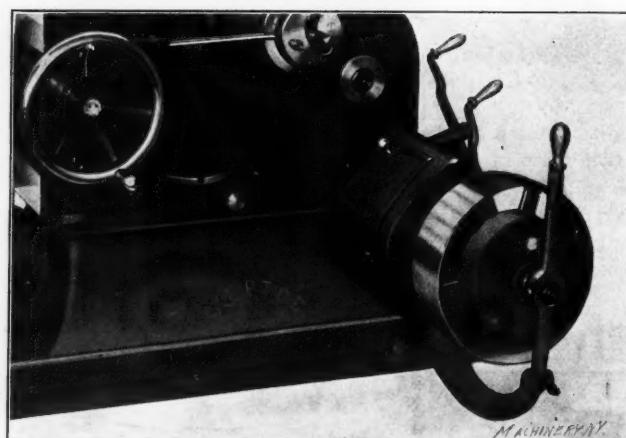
Back-geared Crank-shaper with Speed-box and Clutch Pulley
